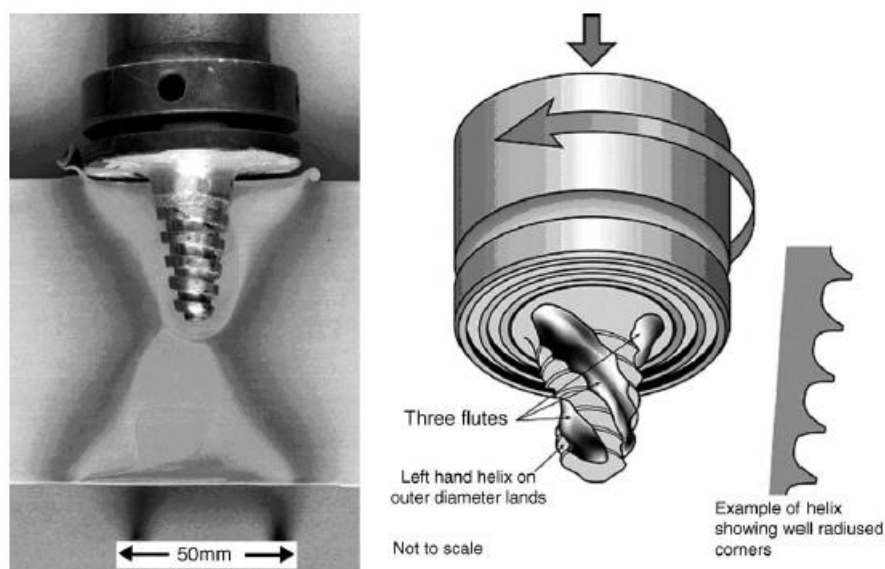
"Whorl™ and MX Triflute™ tools developed by TheWelding Institute (TWI), UK" [43]
